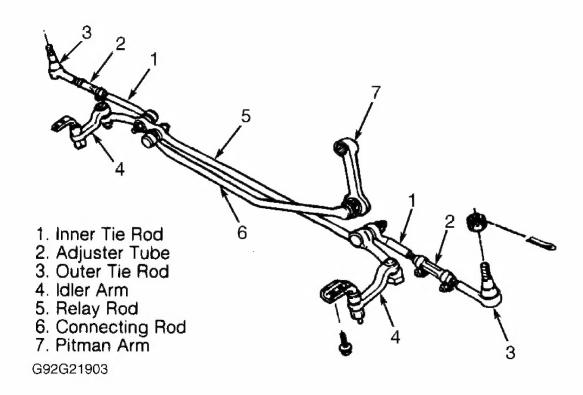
Exploded View Of Steering Linkage ("M" Series) Courtesy of GENERAL MOTORS CORP.
